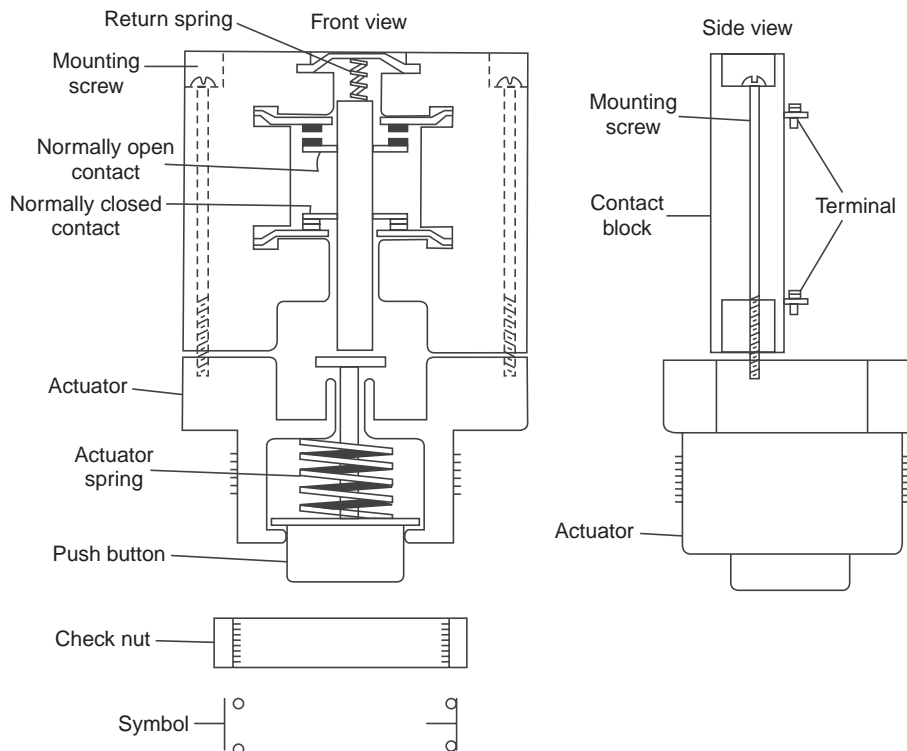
(a) Cross sectional view and end view of a push button.
